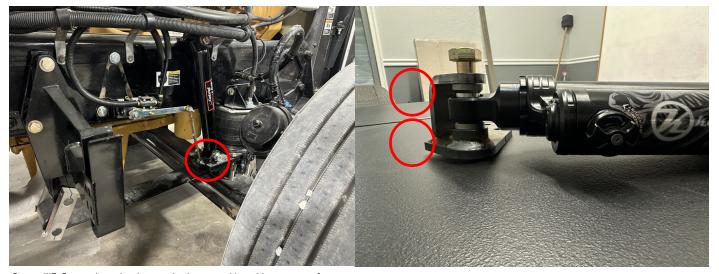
Figure shows heigh control value assembly and lower mount for height control valve attached to the lower bag mount.
